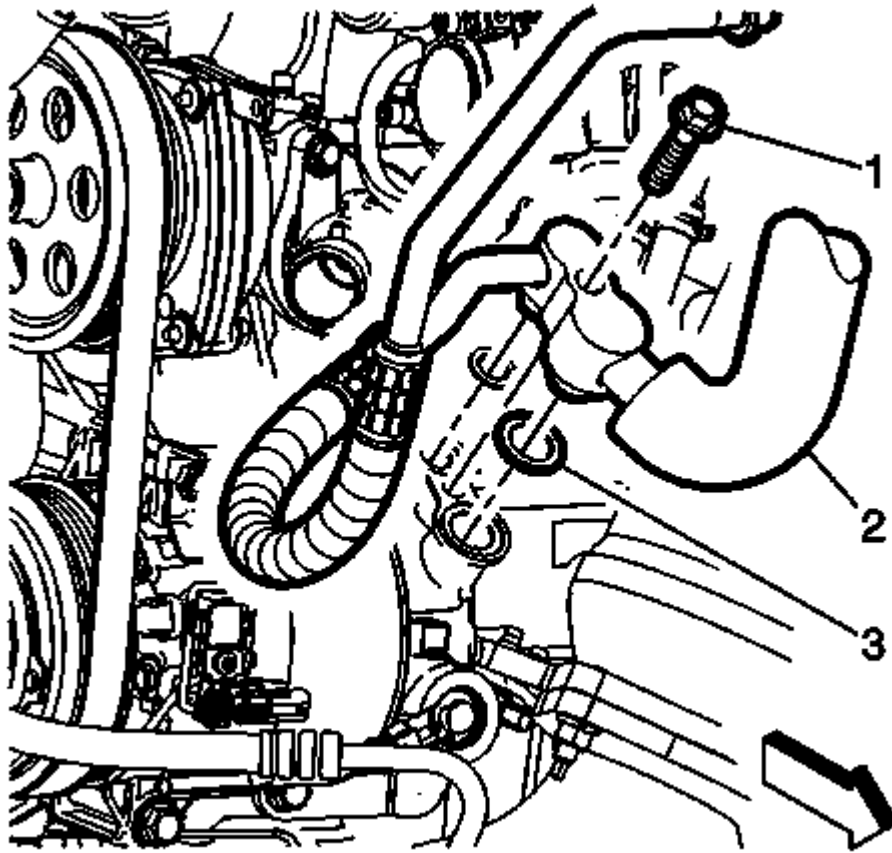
Air Conditioning Compressor Hose Assembly Bolt
